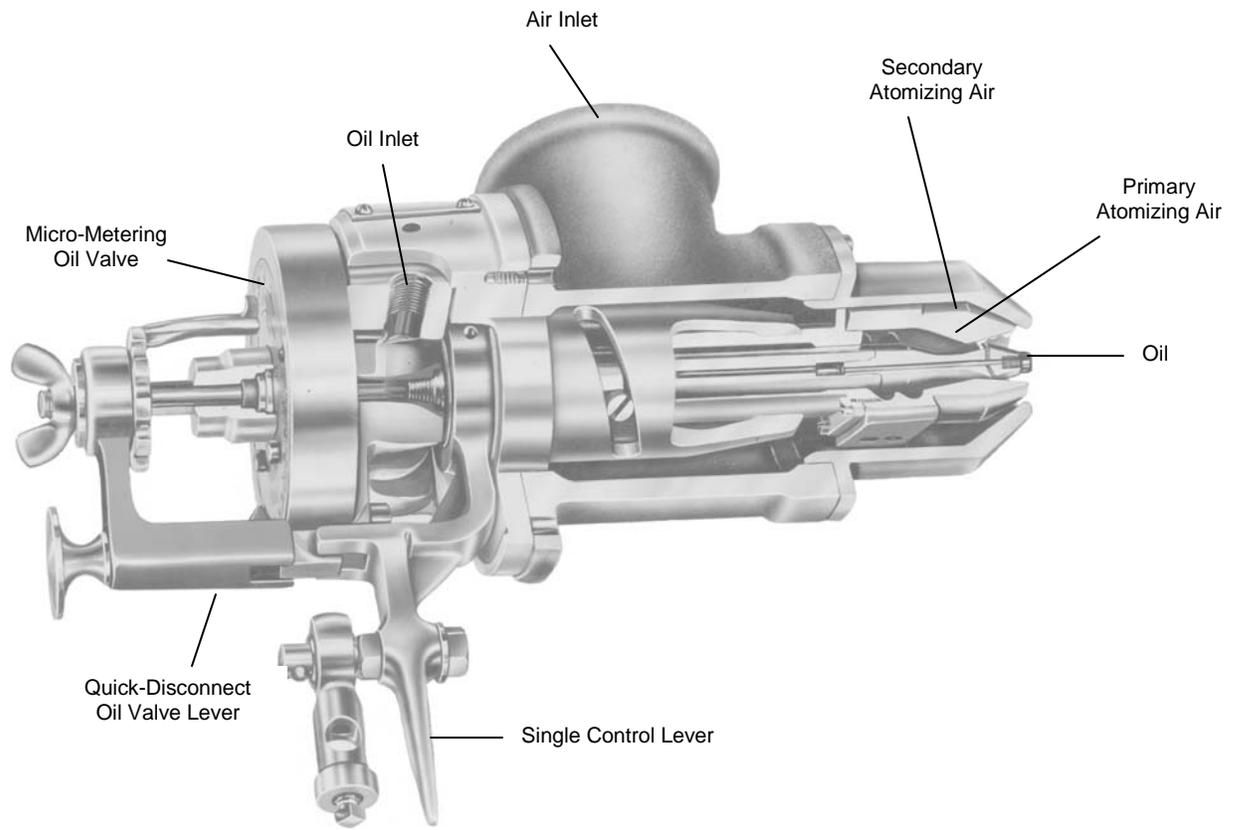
Sectional View Of Hauck Self Proportioning Oil Burner
